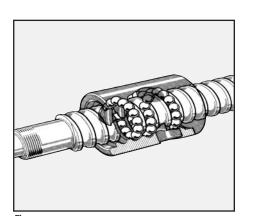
Button-type Segment Ball Return System. Used On Single Start 5 and 10mm leads
